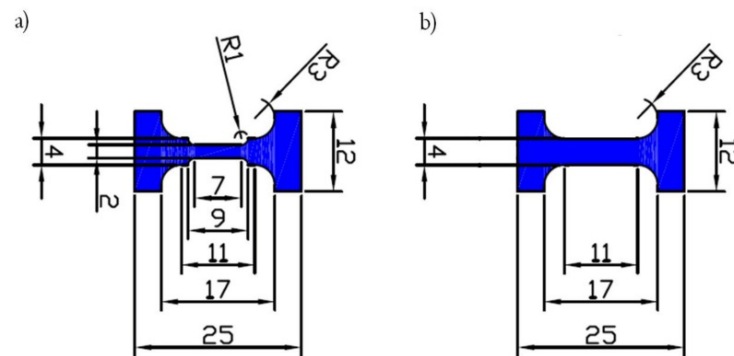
(a) Schematic drawings of sub-size specimens used for tensile testing, where the gage length is 7 mm and the width is 2 mm. (b) Schematic drawing of sub-size specimen used for tensile testing in case TEM inspection is needed, where the gage length is 11 mm and the width is 4 mm.
